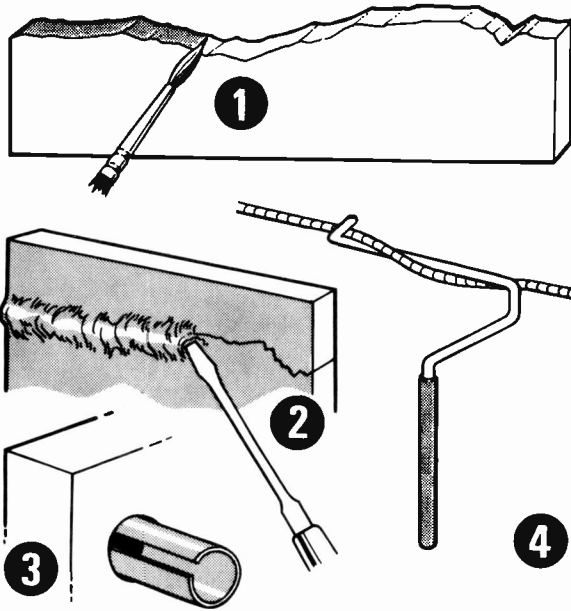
Applying carbon tetrachloride to a surface to be welded using a camel-haired brush held so that it faces the inside, non-visible surface of the case being repaired. Fig. 2: Working up a ridge on the inside surface with a screwdriver blade to reinforce the weld. Fig. 3: Inserting systoflex sleeving to plug a screw hole that has stripped threads. Note slit side. Fig. 4: Simple wire pointer with red p.v.c. covering taken from p.v.c. cable. A single twist of the drive cord will hold the pointer firm yet allow it to be easily slid along for calibration.
